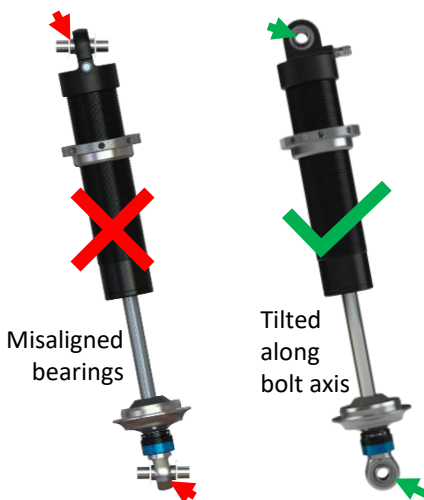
The shock should be mounted with minimal misalignment of the spherical bearings. Tilt along the bolt axis is OK.
